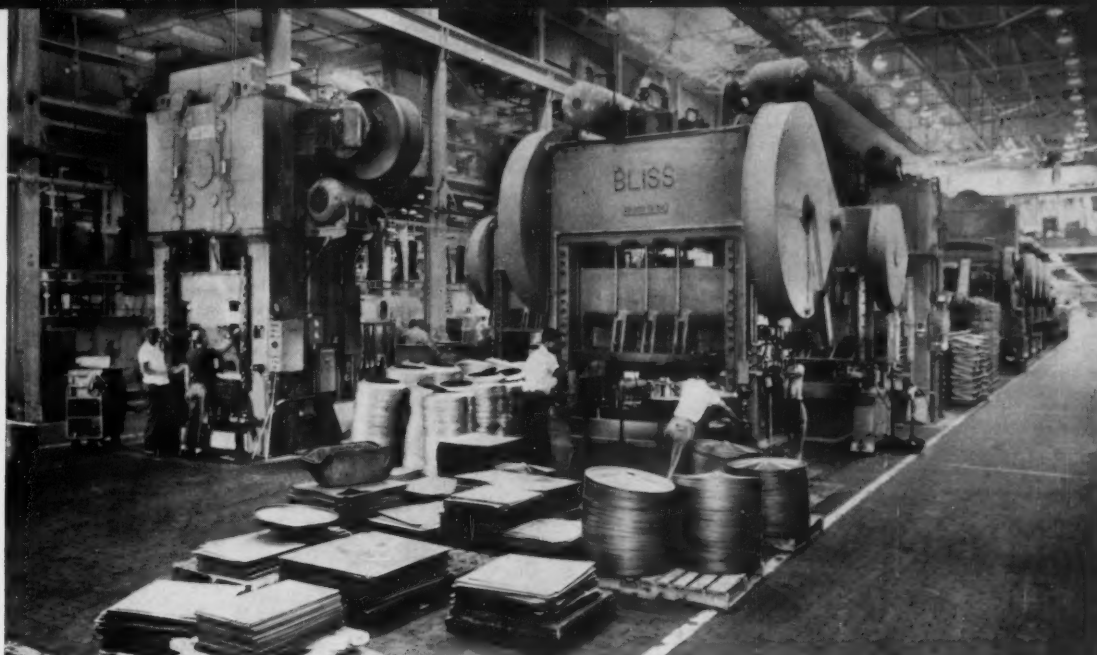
A view of a forced-torque 500-H.P. drive applied directly to the crank-arm of a press.
